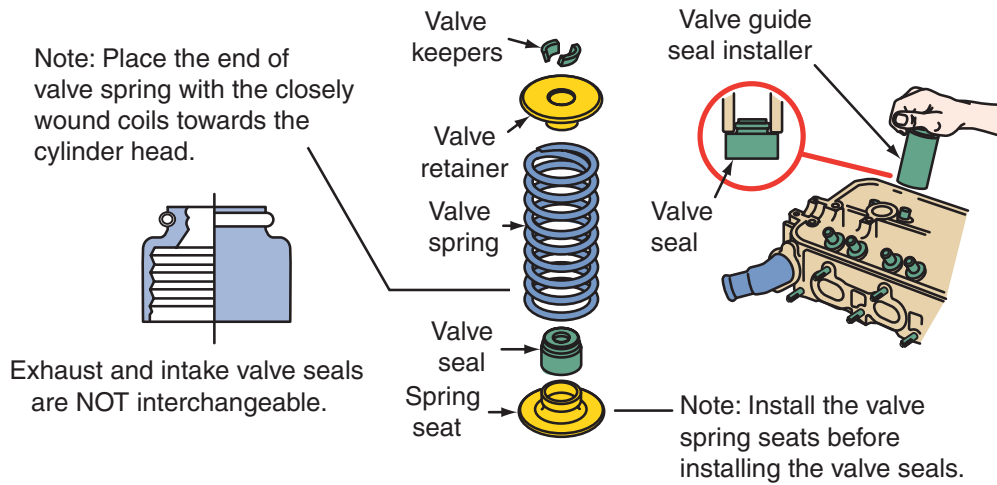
Installation of a positive oil seal onto a valve guide.
